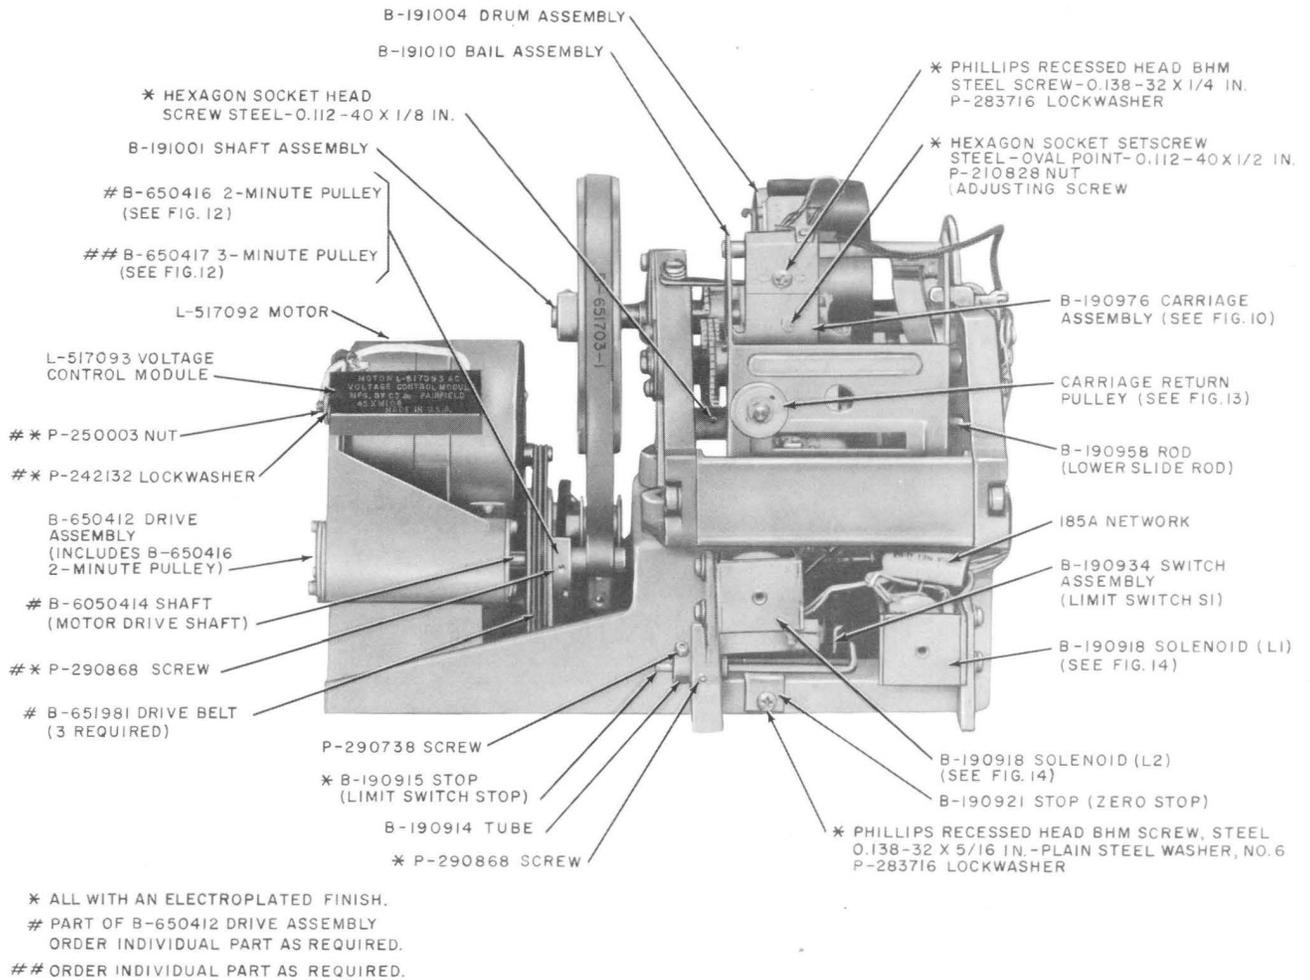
KS-16765 L3 Recorder Equipped With L-517092 Motor and L-517093 Voltage Control Module
